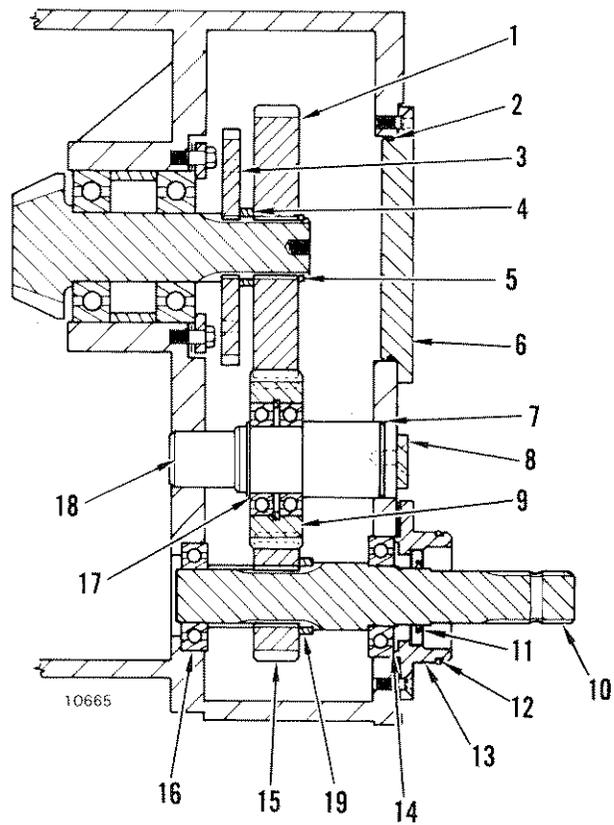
ASSEMBLY OF THE PTO GEAR ASSEMBLY WITH THE 117:1 GEAR RATIO
